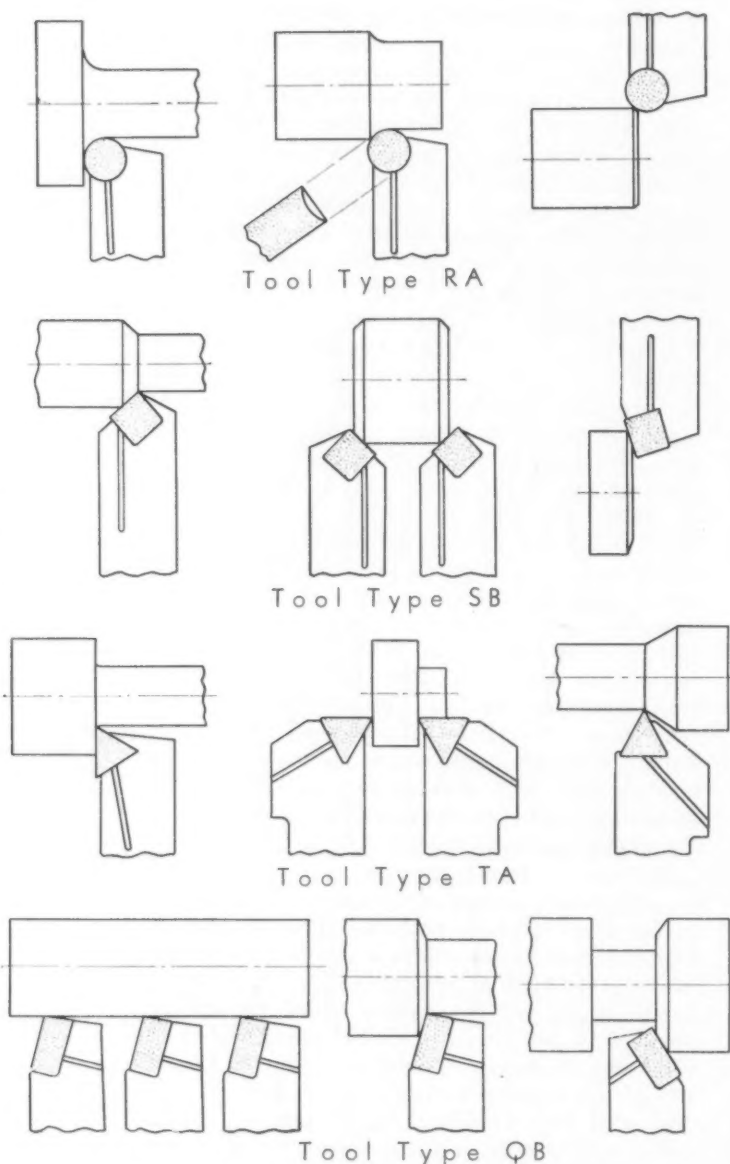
Standard insert tool holders and a typical application for which each is suited.
